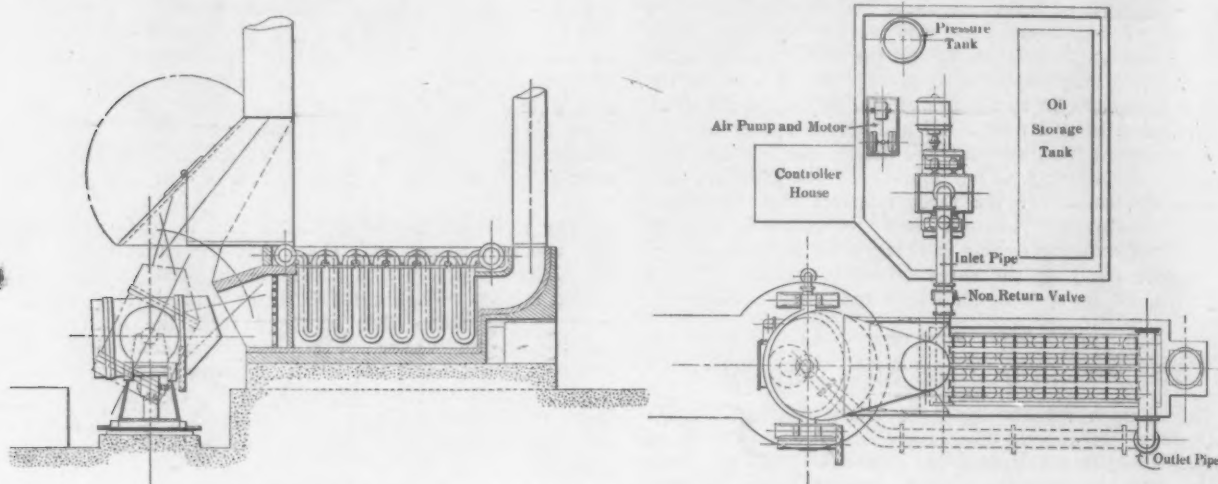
Elevation and Plan of a Stock Converter Installation.
